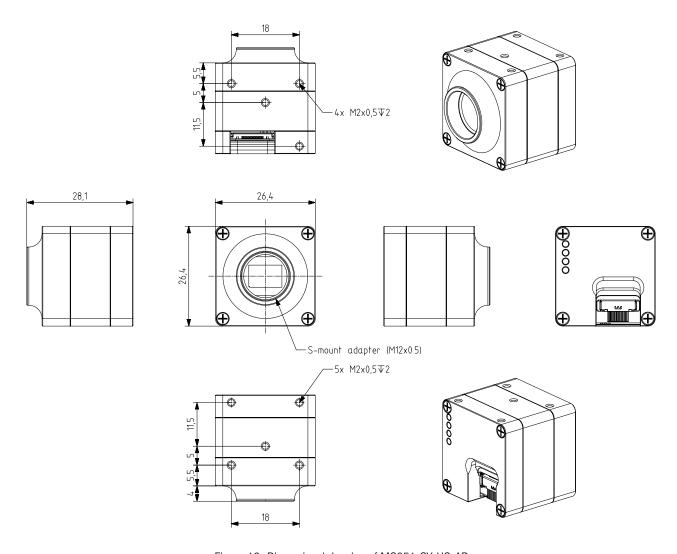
Dimensional drawing of MC051-SY-UC-AR
